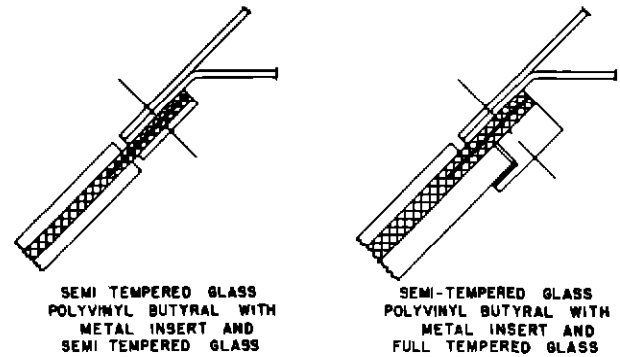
Type II Windshield Panel Single Pane With Flexible Bolted Edge Type of Mounting
